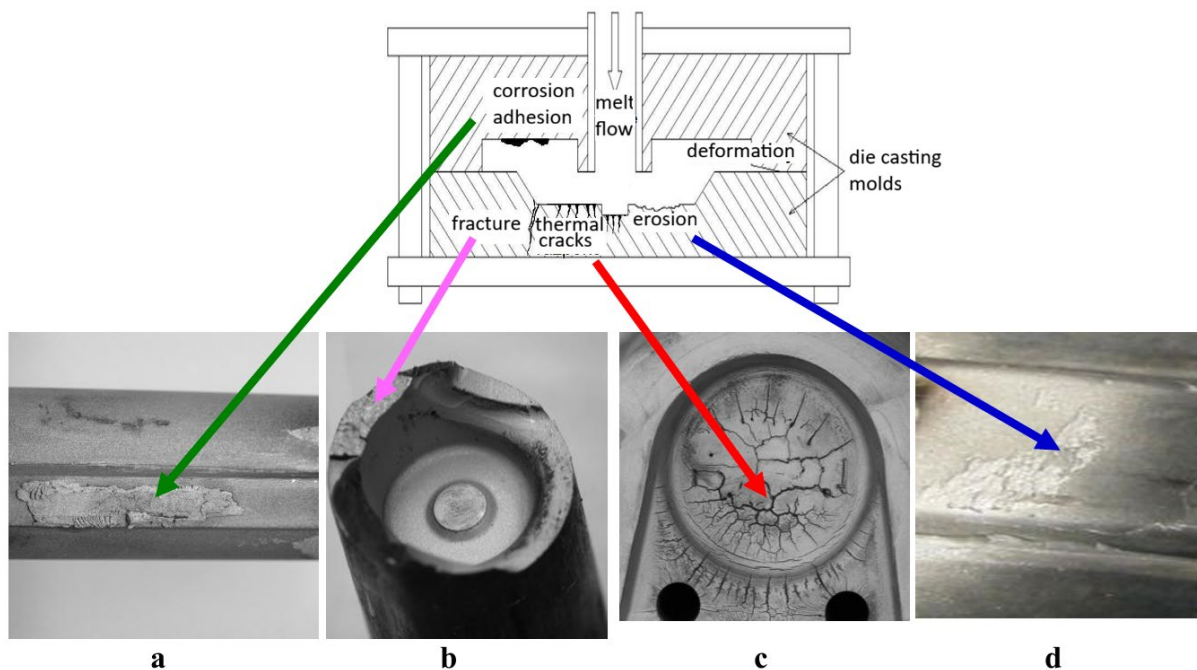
Types of defects on die casting moulds a) corrosion, adhesion, b) fracture, c) thermal fatigue cracks, d) erosion
